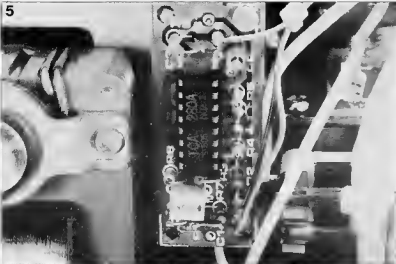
The dimmer board fitted next to the fan motor in a slide projector. C1 is mounted at the track side of the PCB.
